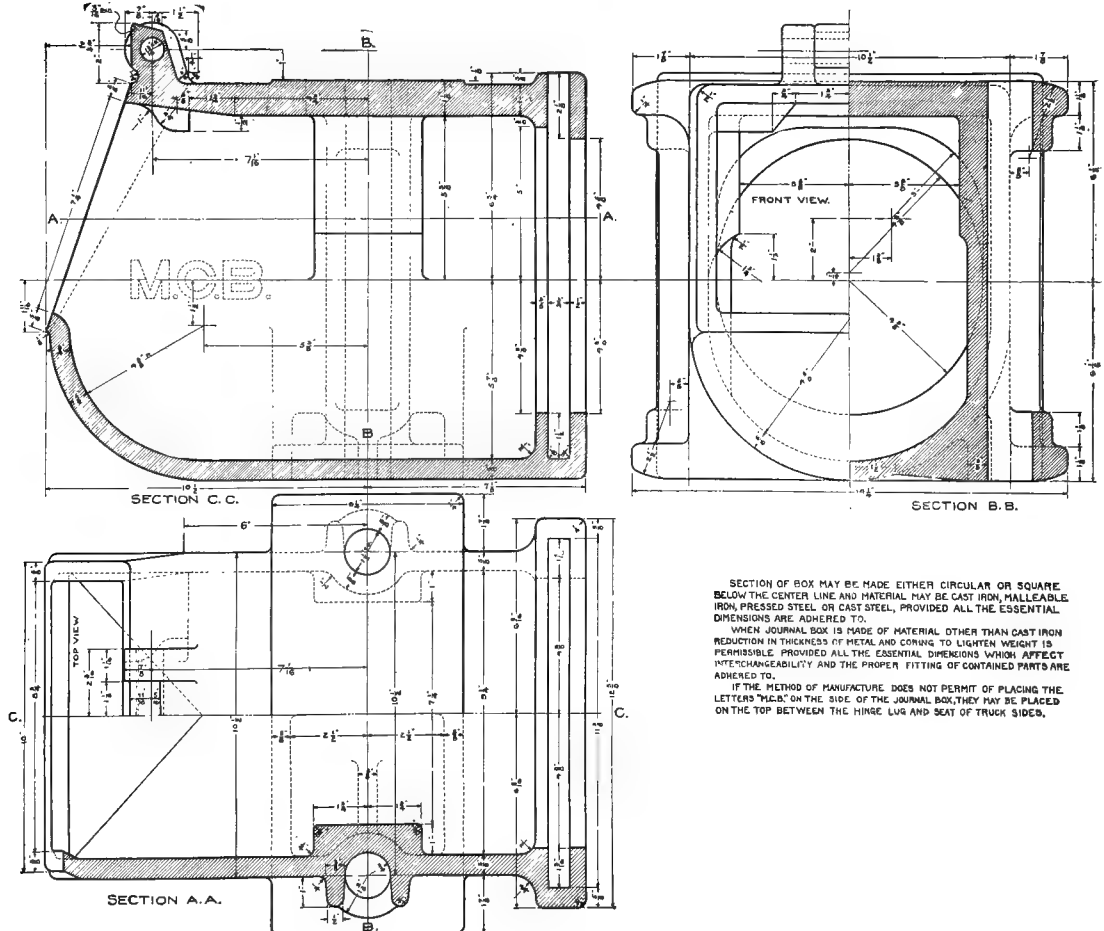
M. C. B. Standard Box and Contained Parts for 6 in. by 11 in. Freight Car Journal. (M. C. B. Sheet 12A.)
